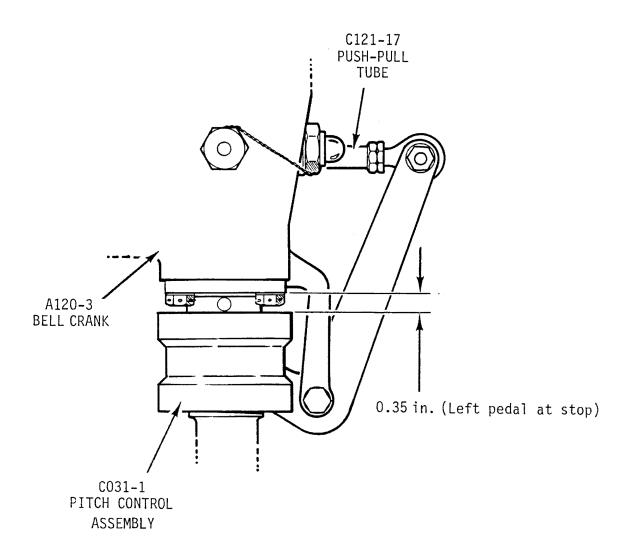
A120-3 BELL CRANK RIGGING
